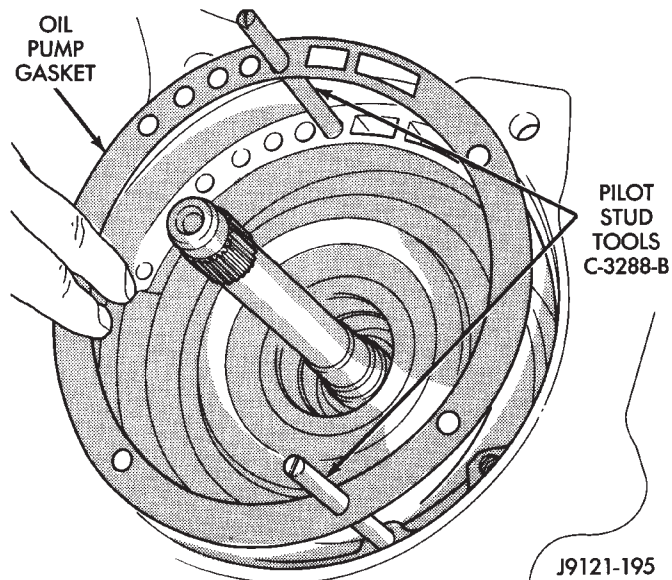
Installing Pilot Studs And Oil Pump Gasket
